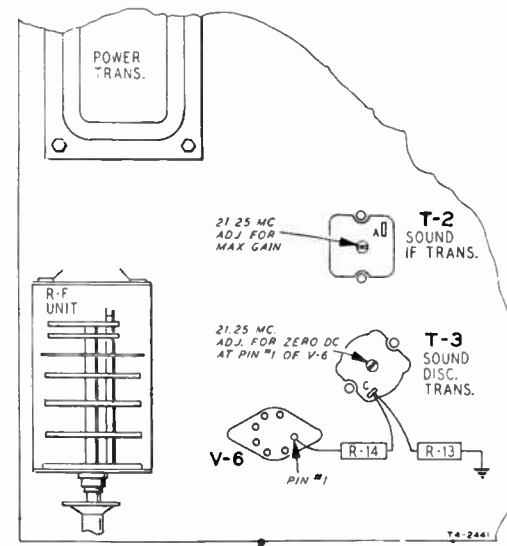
Bottom Chassis Audio I- and Discriminator Adjustments
